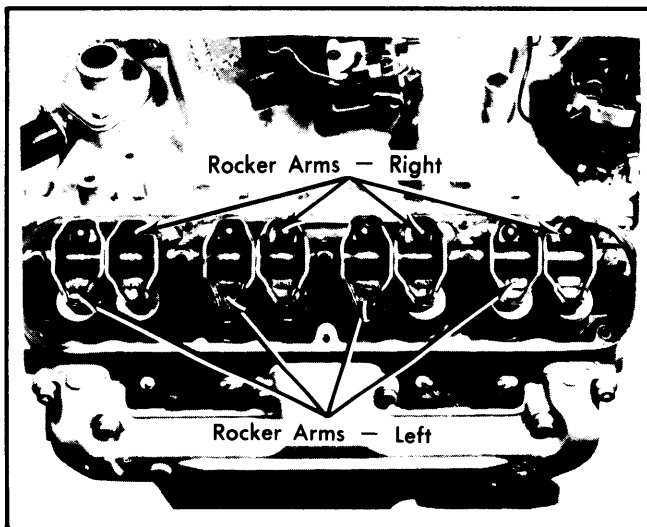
Rocker Arm Location on Rocker Arm Shaft
